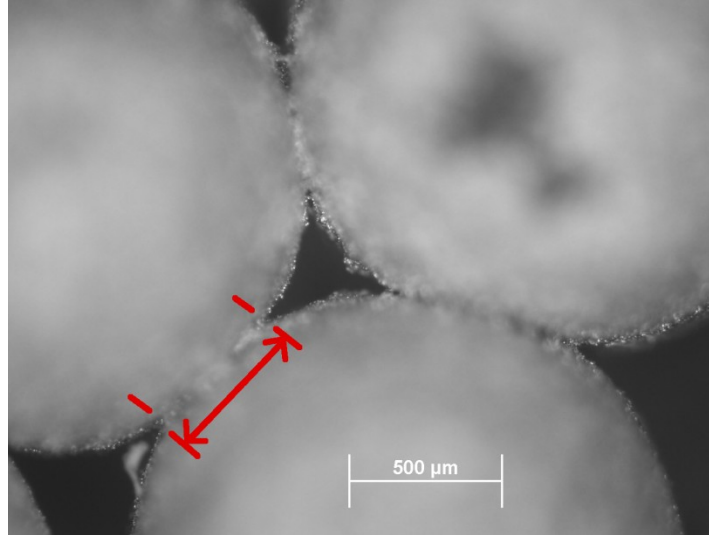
Sample image of a weld size microscopy measurement.
